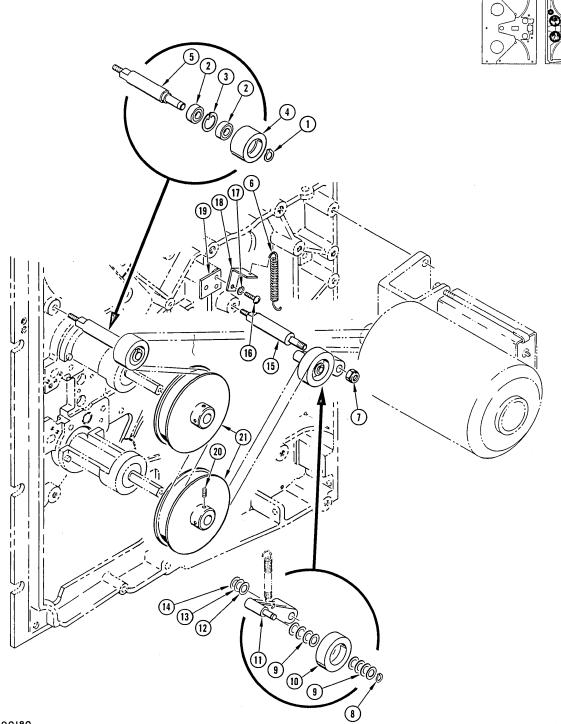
Capstan Drive Pulleys and Idler Arm
